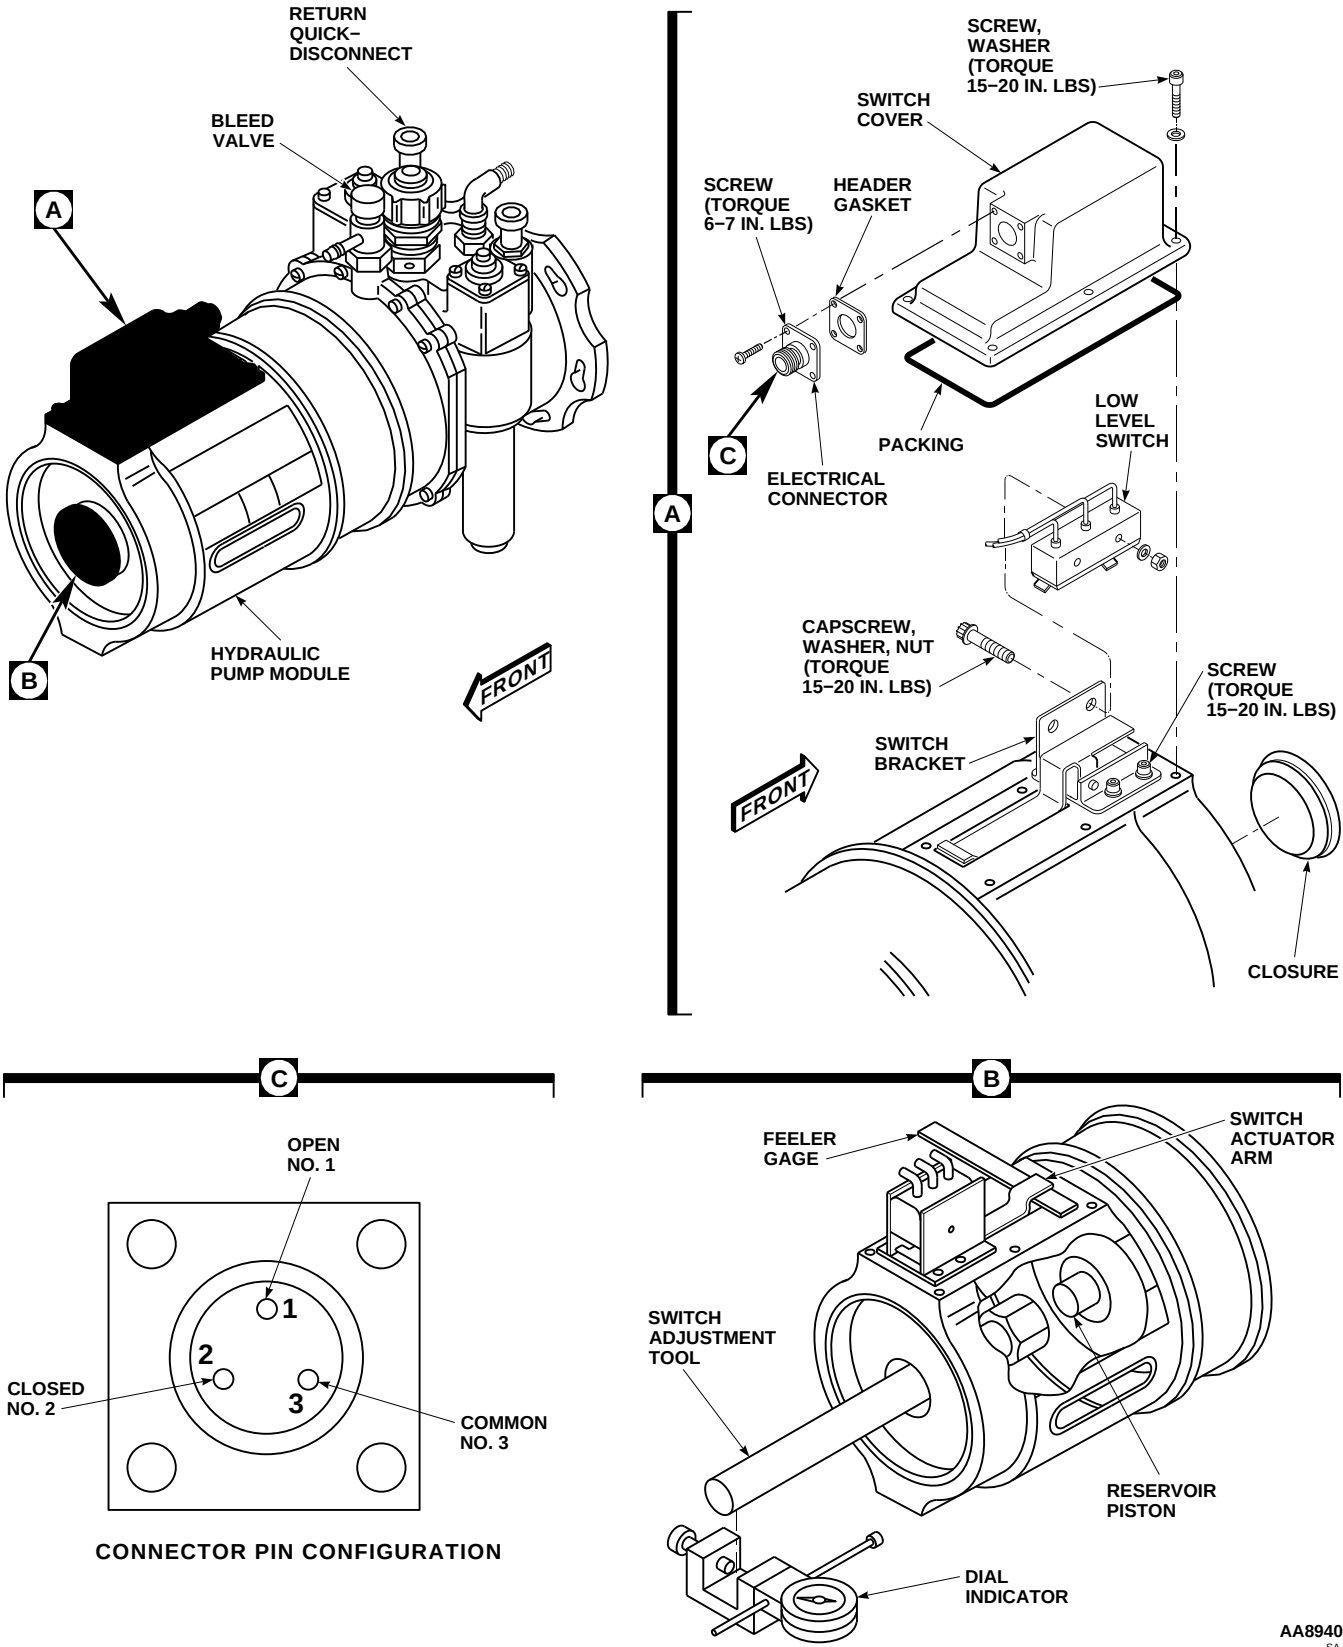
REPLACE/ADJUST HYDRAULIC PUMP MODULE LOW LEVEL SWITCH (BENCH)
